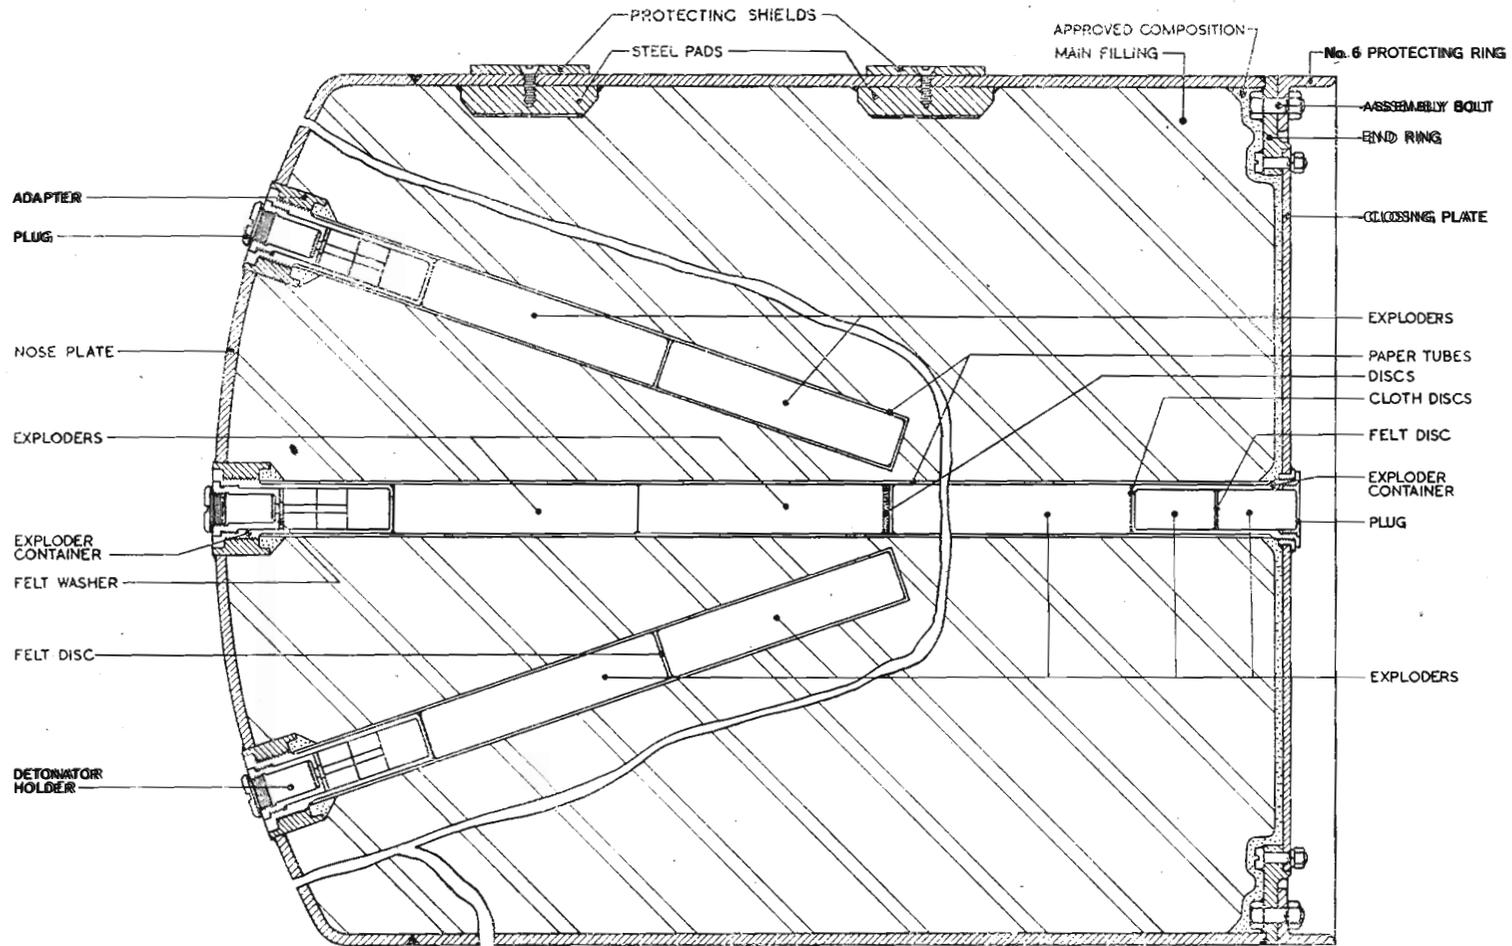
Mk. II bomb body front section fitted with protecting ring
